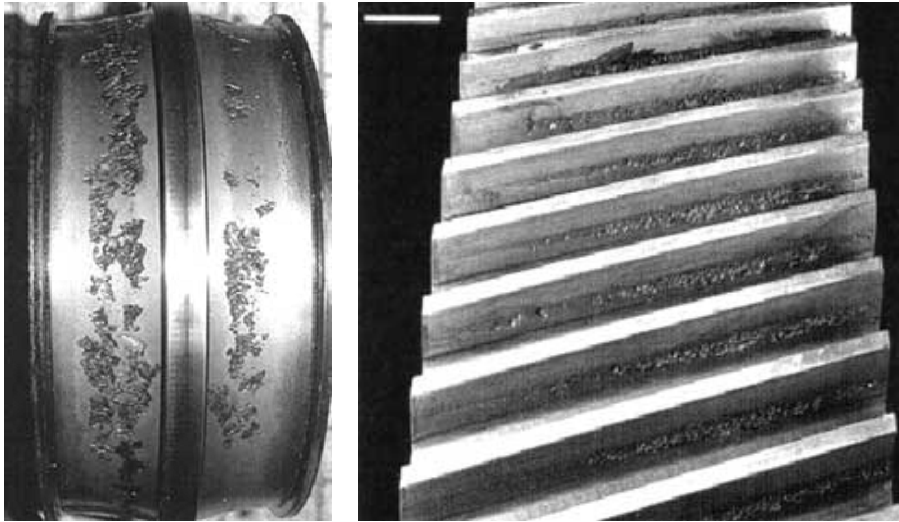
Fatigue spalls on roller bearing inner ring and fatigue pitting (spalling) on pitch line in gear teeth [1].
